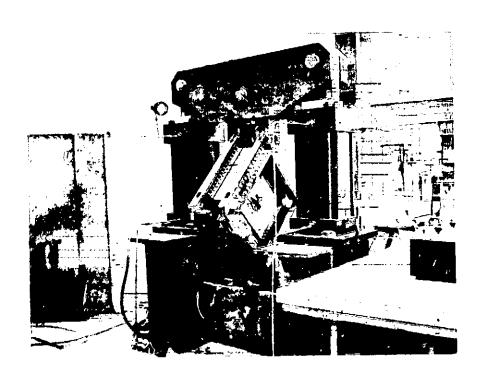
Positioning Tool and Holder for Torch Tip
